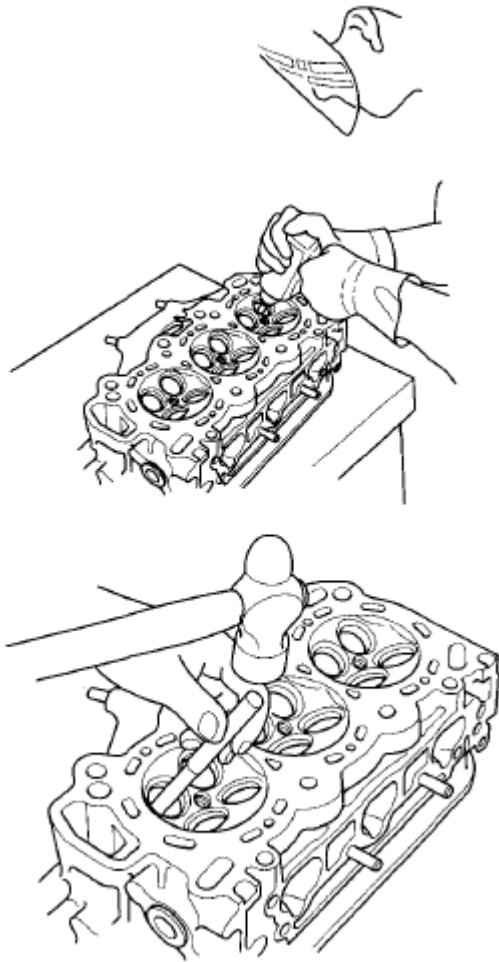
Turning Head Over And Drive Guide Out Toward Camshaft Side Of Head
